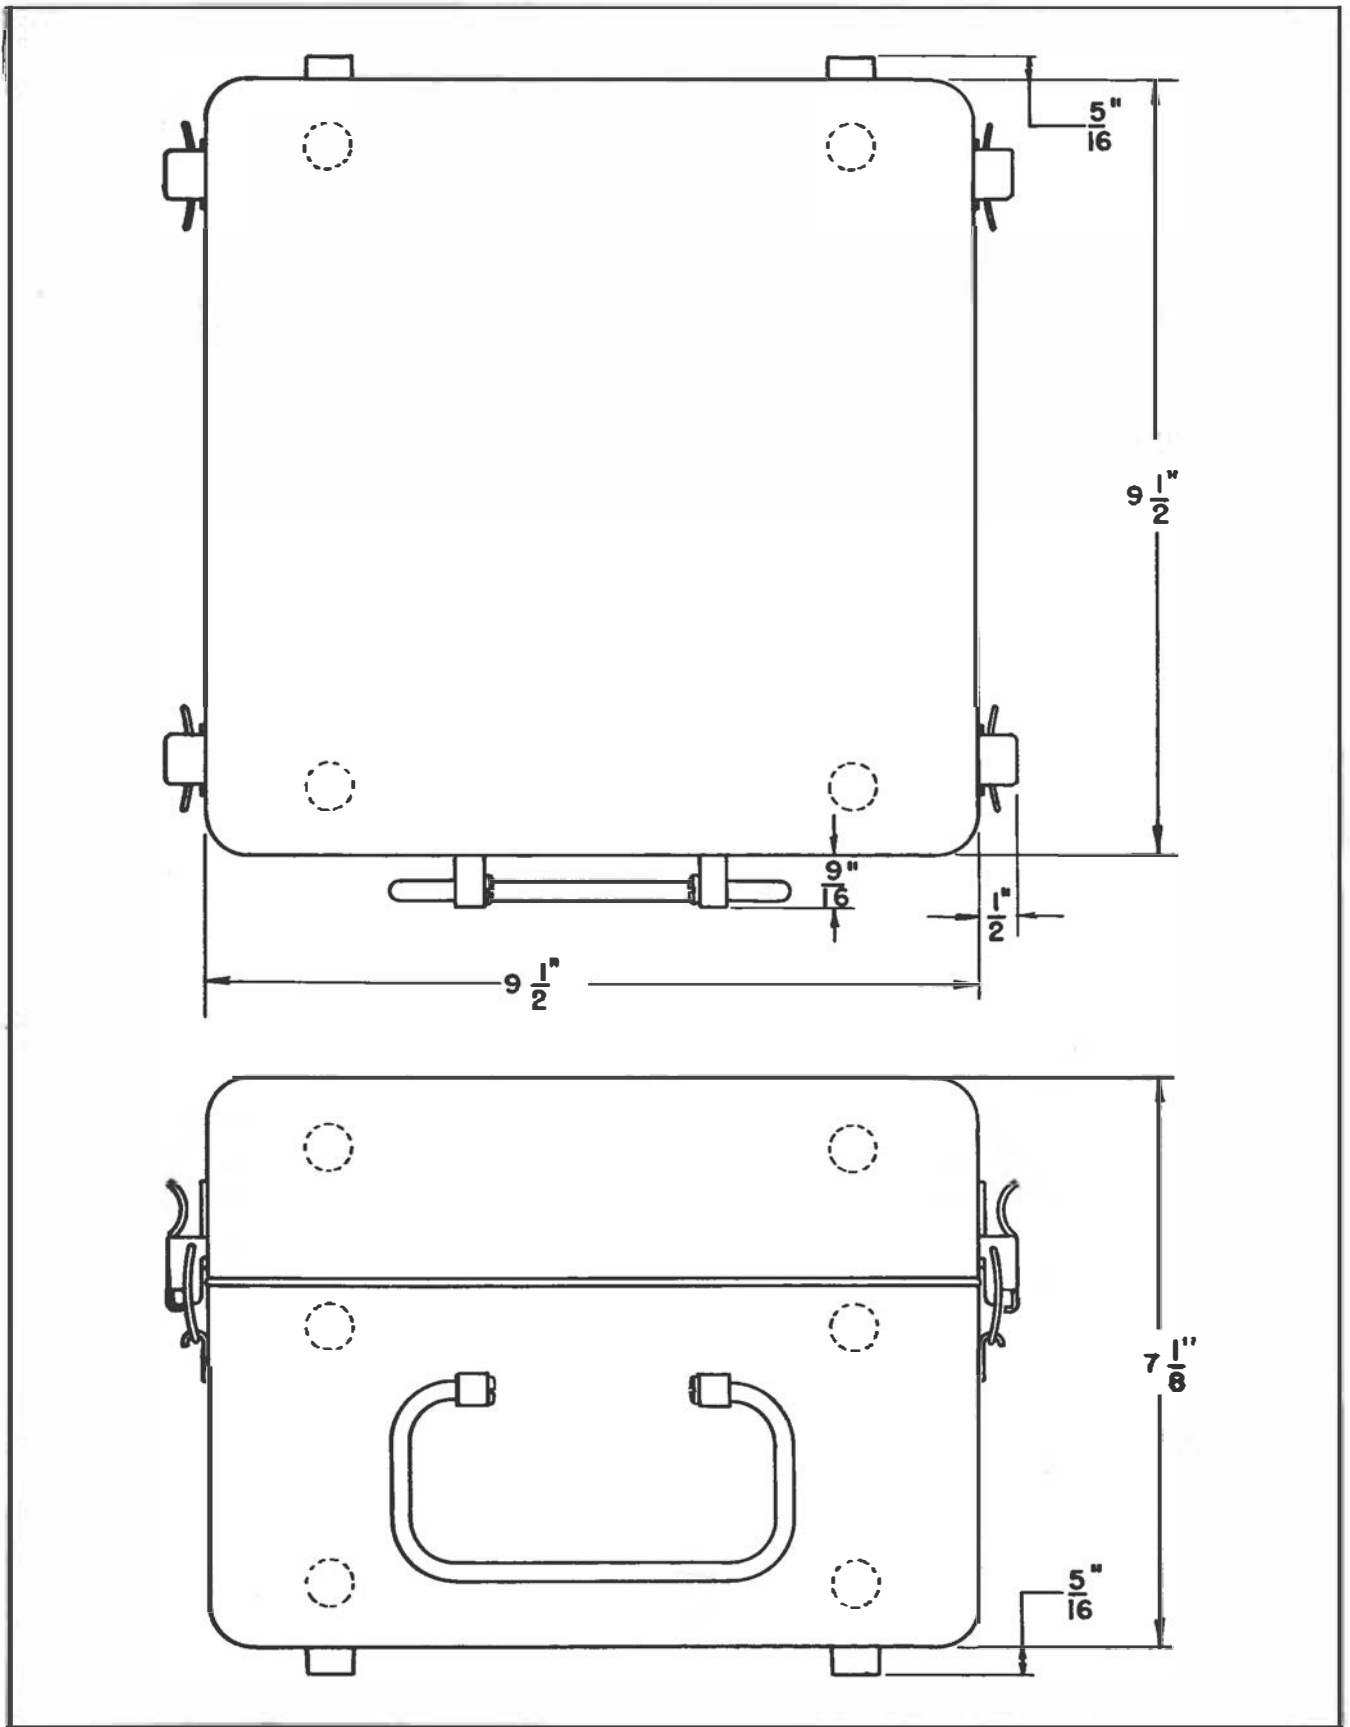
Voltmeters TS-375/U and TS-375A/U, Dimensional Drawing
